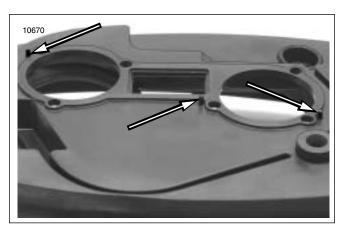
Air Filter Gasket Alignment Pins (3)
